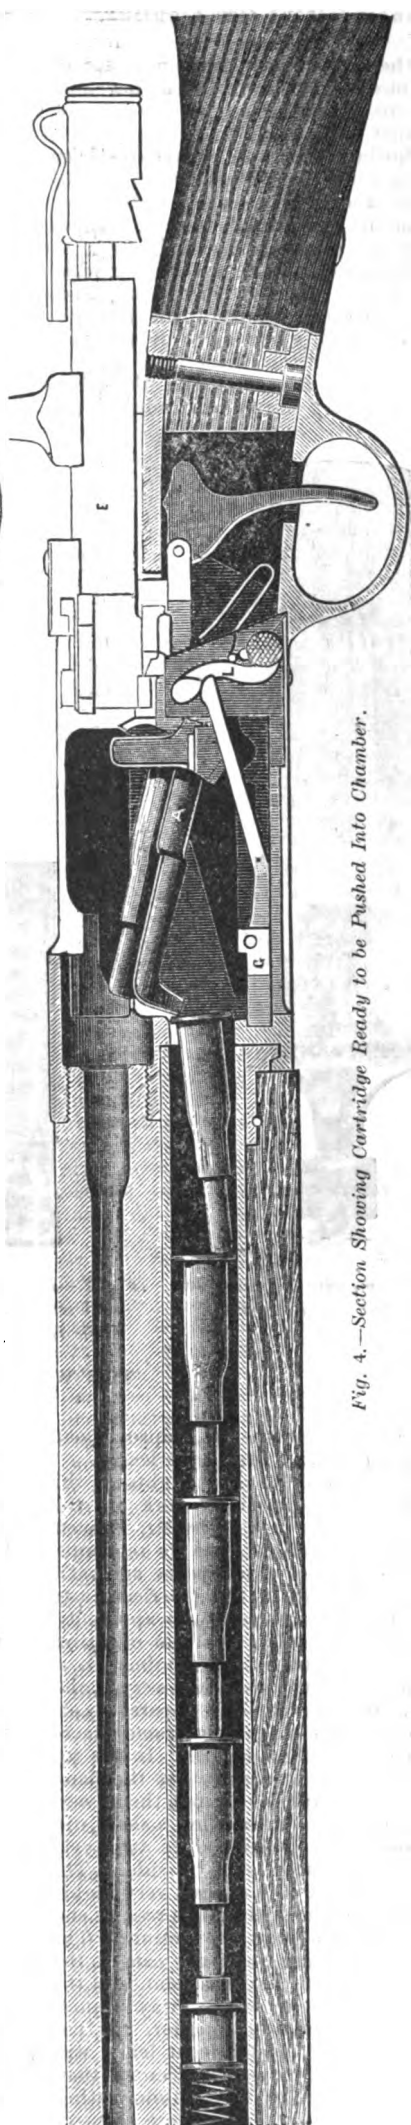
Section Showing Cartridge Ready to be Pushed Into Chamber.
